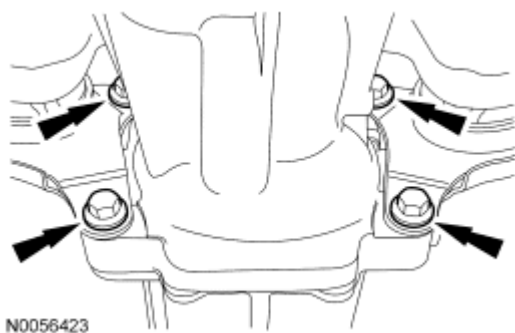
Locating Differential Housing-To-Front Insulator Bracket Bolts
